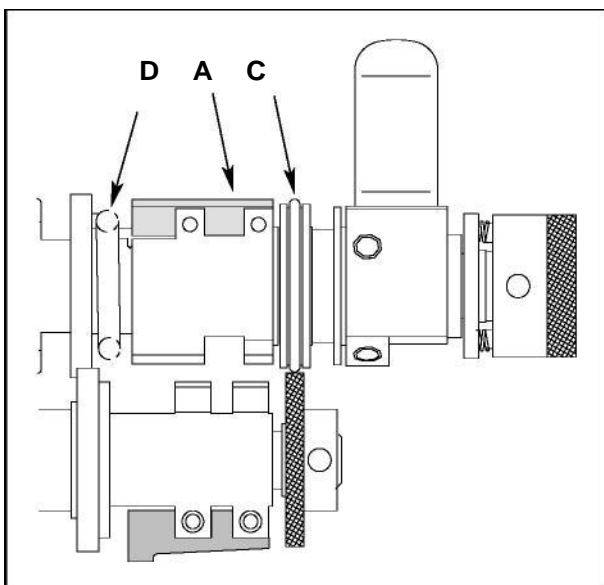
Make Sure That Upper Blade Does Not Touch Ring or Springs
